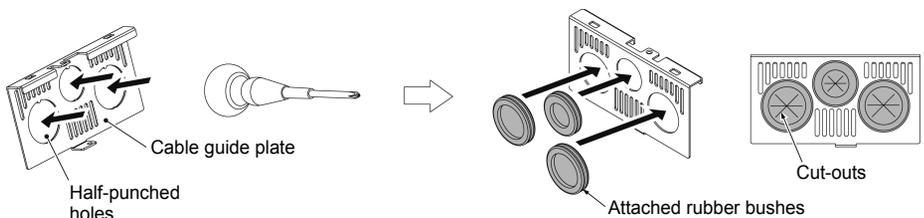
Punching out the Holes and Mounting the Rubber Bushes
